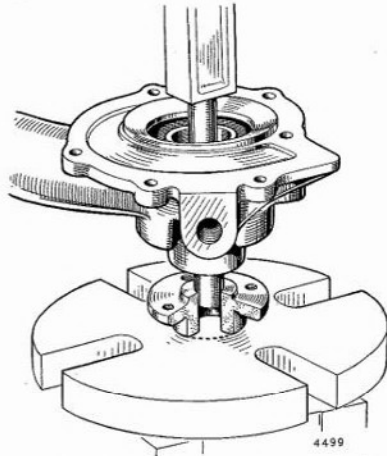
Pressing the bearing shaft into the fan mounting flange
